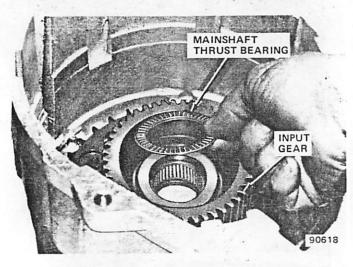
D-23 Mainshaft Thrust Bearing and Input Gear
